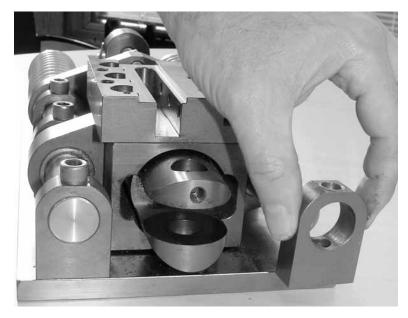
Remove the shaft supports to allow the feed block and feed screw assembly to be removed.
